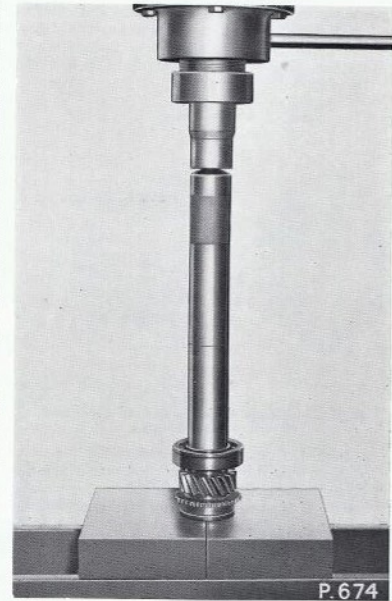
Pressing the ball bearing on the primary shaft using the Churchill Hollow Drift portion of R.G.77 and the extension adapter R.G.77-1 with the Churchill Pad R.G.79 to protect the gear cone
